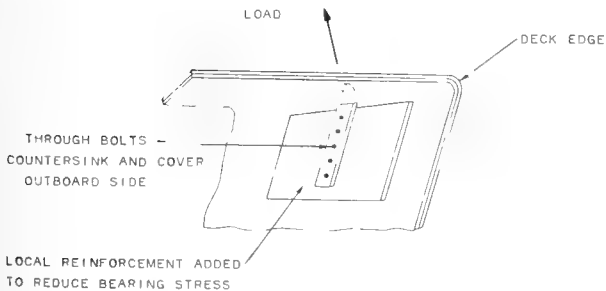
Chain Plate Attachments - Simple Interior Side Stay Chain Plate
